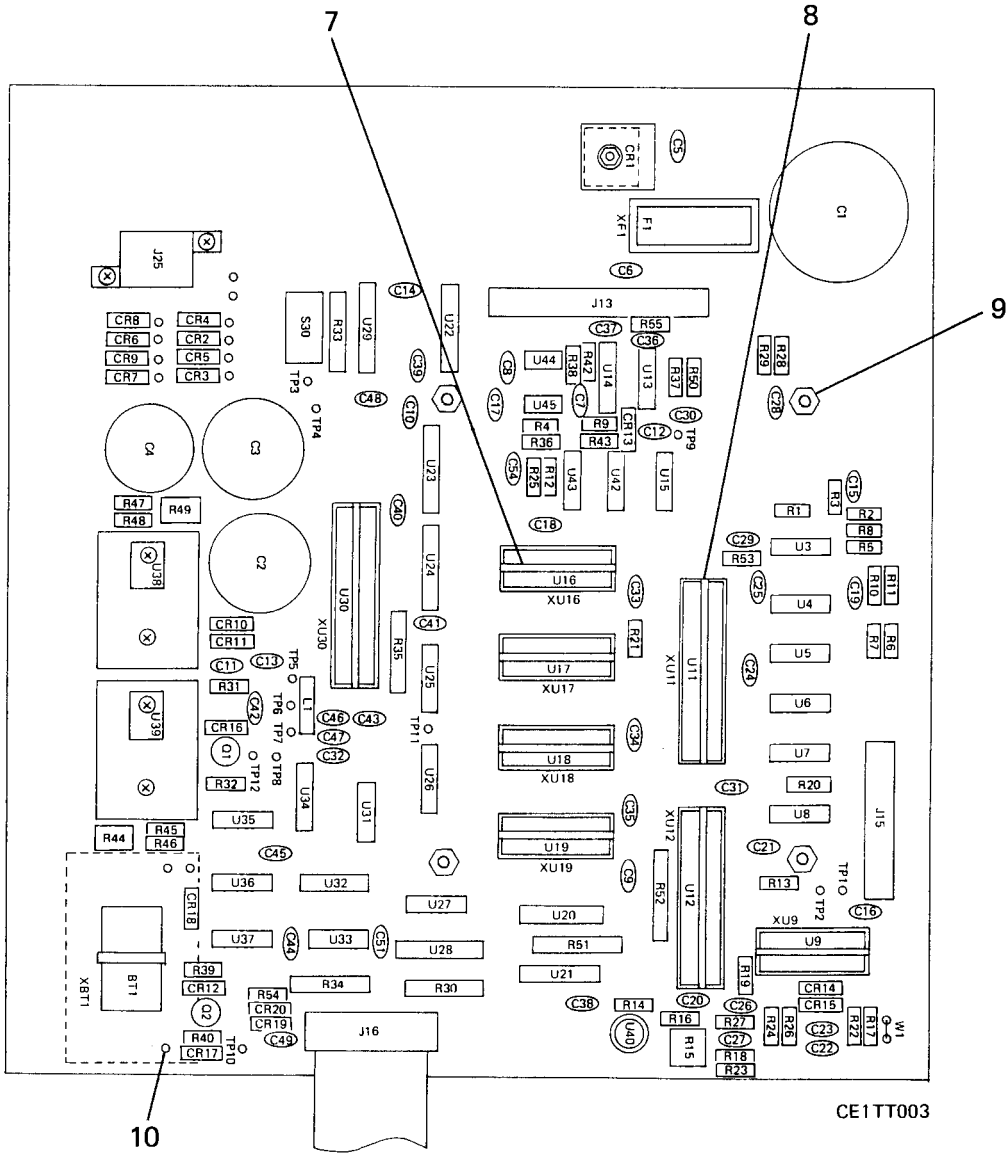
PCB Assy Processor (Sheet 2 of 6)
